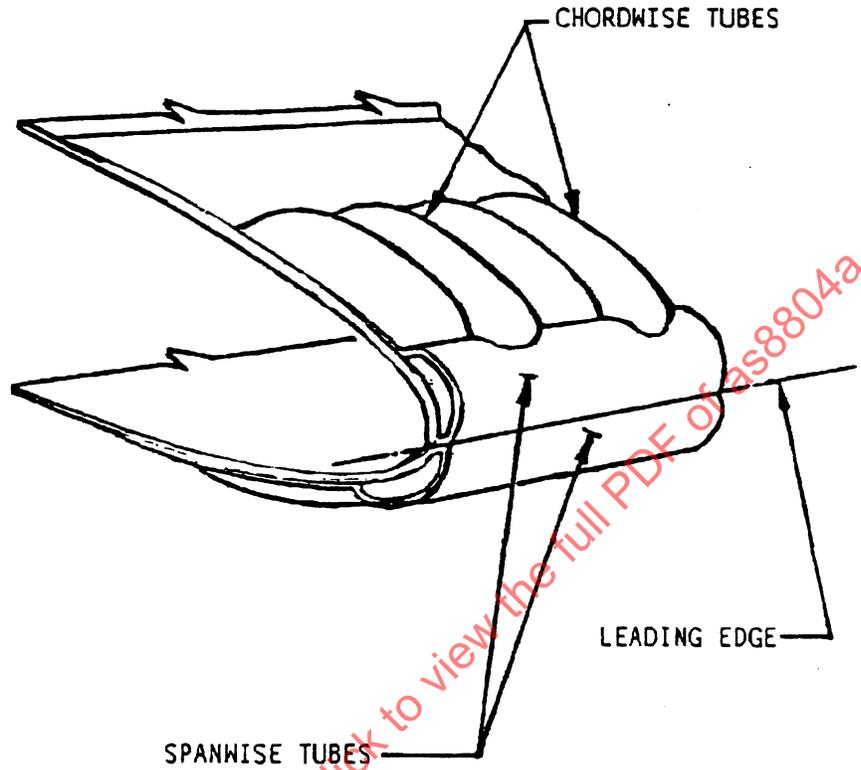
Rotorcraft blade pneumatic boot rotary wing aircraft.
